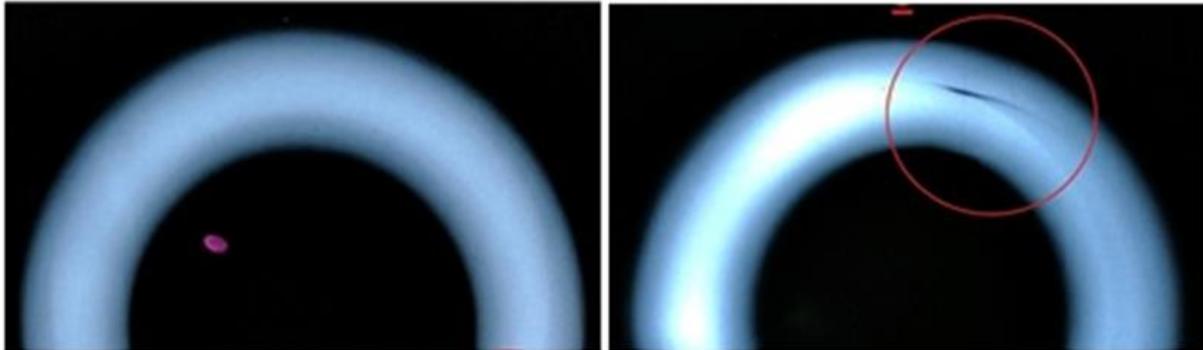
Samples of X-ray films showing cases of tight (left) and weak (right) PMD crimping for bushing-bushing joints. Circle shows the area of improper connection. Images obtained from the end face of bushing.
